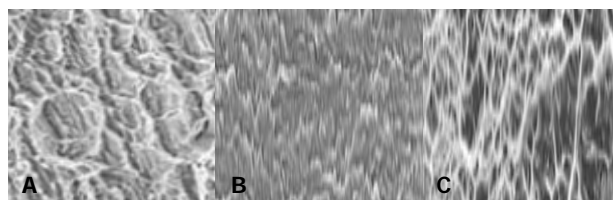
SEM micrographs of the fracture surfaces of Ti-6Al-7Nb (A) laser welded with argon shielding; (B) laser welded without argon shielding; (C) control.
